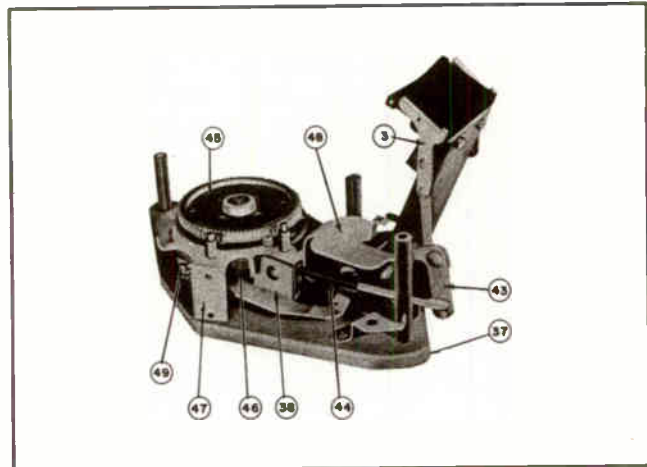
Showing the Parts Location in the Sub-Plate Assembly of the Model 70. (Courtesy Webster-Chicago)
